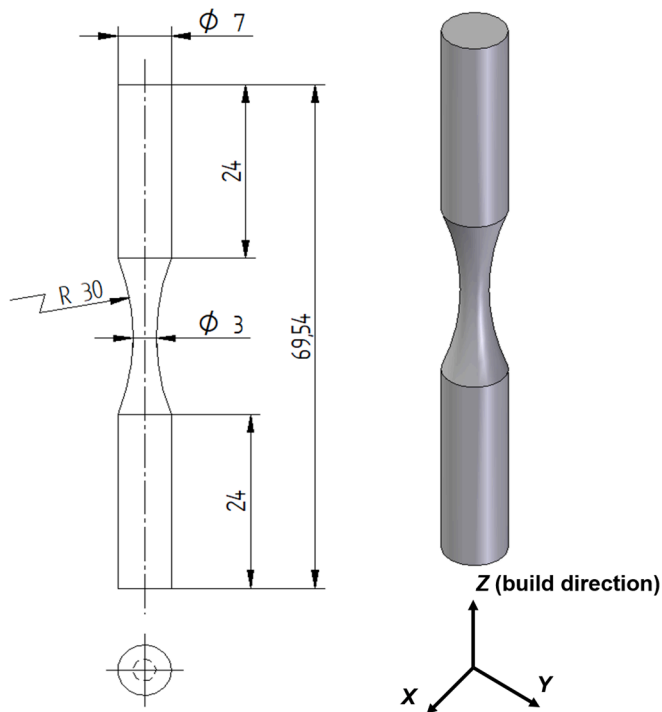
Fatigue test specimen geometry and build direction (Z axis). Dimensions in mm.
